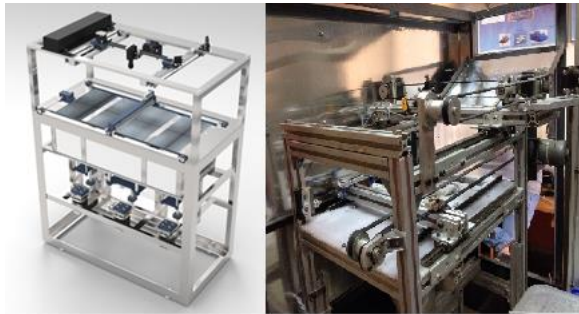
Testing model of the rapid prototyping machine by laser sintering
